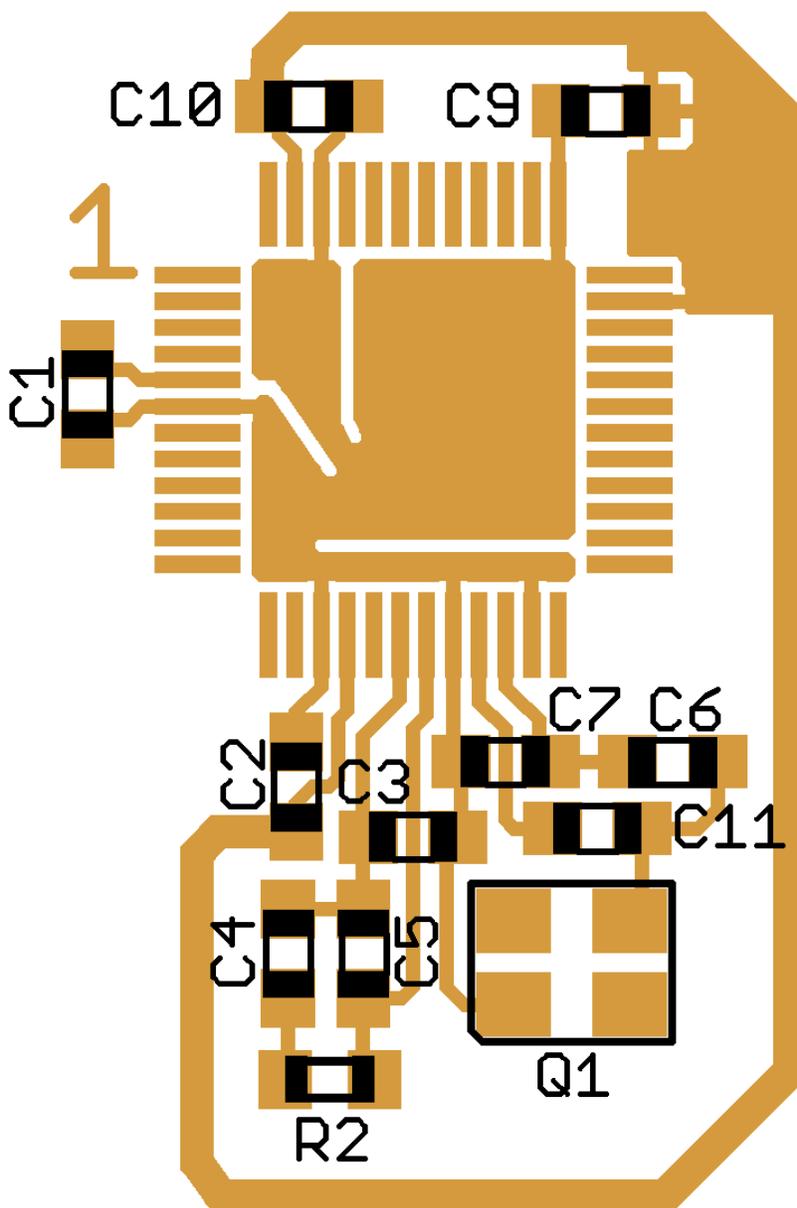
Recommended PCB Layout (48 LQFP) Colpitts Oscillator
